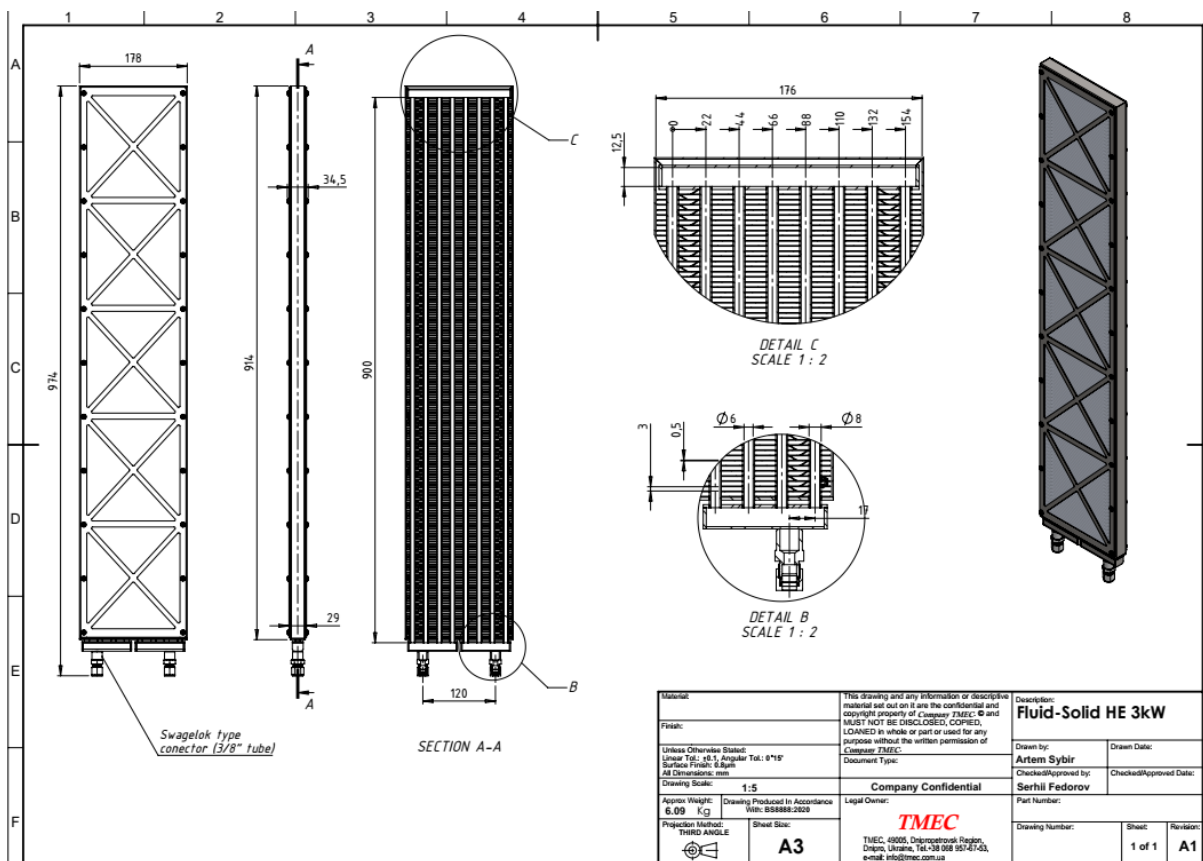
Layout of the heat exchange element and 3D assembly (Source: TMEC)
